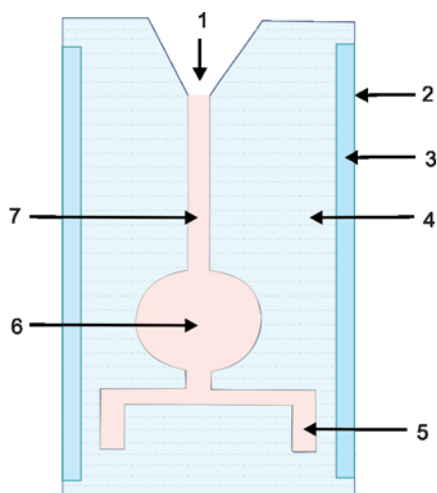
Cross section through inlay casting mould after removal of crucible former, sprue former, and wax
